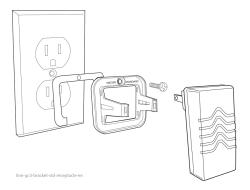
Retaining Wall Bracket—Standard-Style Duplex Receptacle
